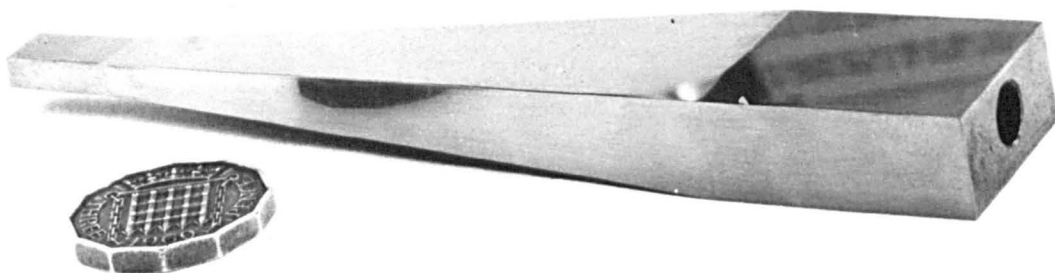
STAINLESS STEEL TAPER MANDREL
